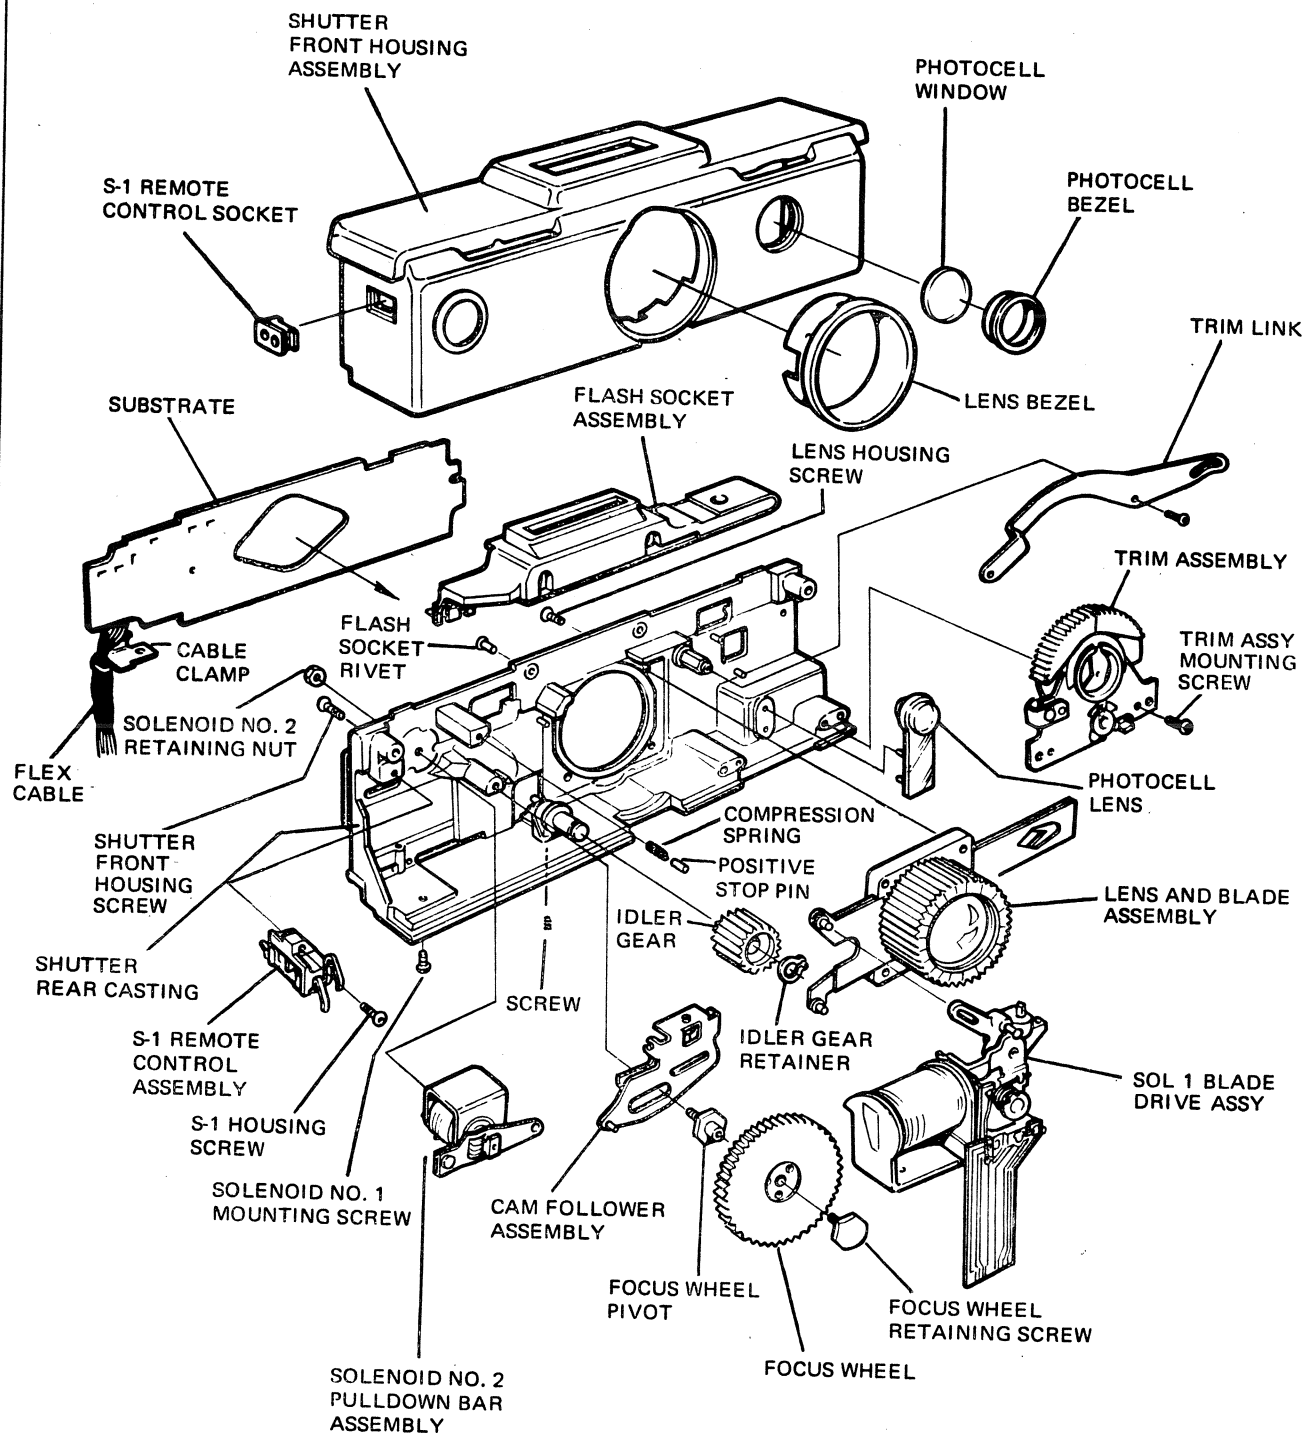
SHUTTER, EXPLODED VIEW
